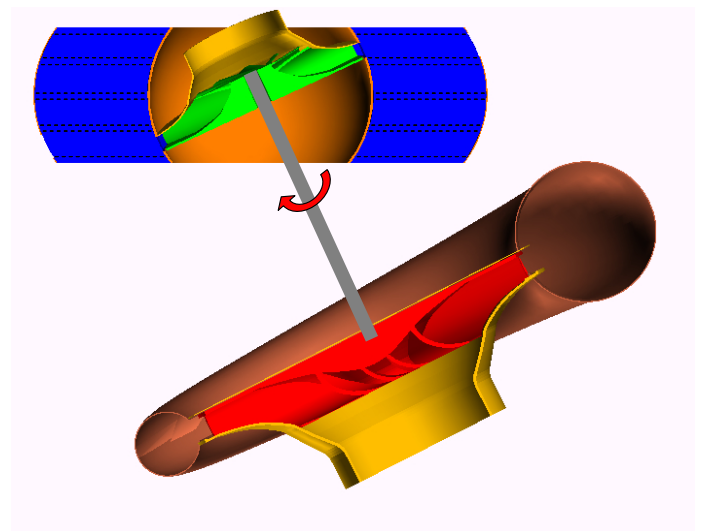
Cut-view of a radial wave rotor topping a gas turbine
